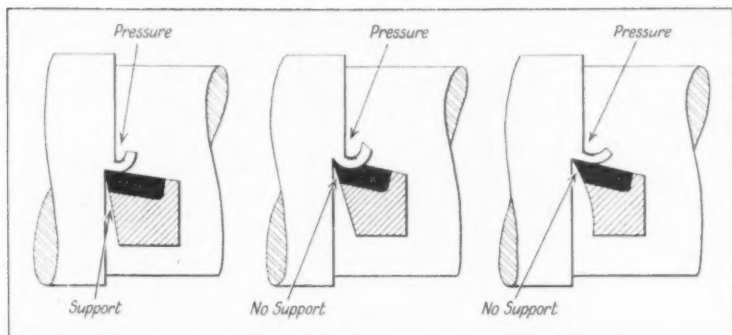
Unless the Carbide Tip is Adequately Supported, the Cutting Edge will Rapidly Deteriorate. (left) Tool with Adequately Supported Tip. (centre) Tool with Too Much Front Clearance. (right) Tool Ground on Periphery of Wheel
